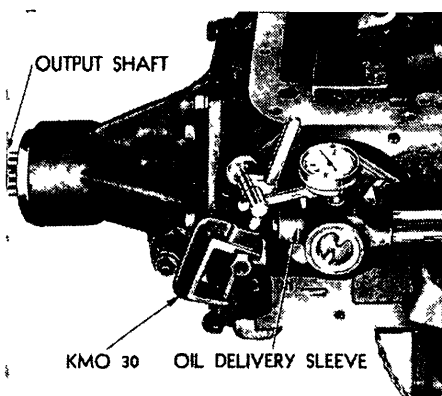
Check governor run-out by mounting dial indicator as shown. Rotate output shaft several revolutions. If run-out of oil delivery sleeve exceeds .005", mark position of governor body on drive flange. Then remove control valve and governor body and check run-out of governor drive flange
